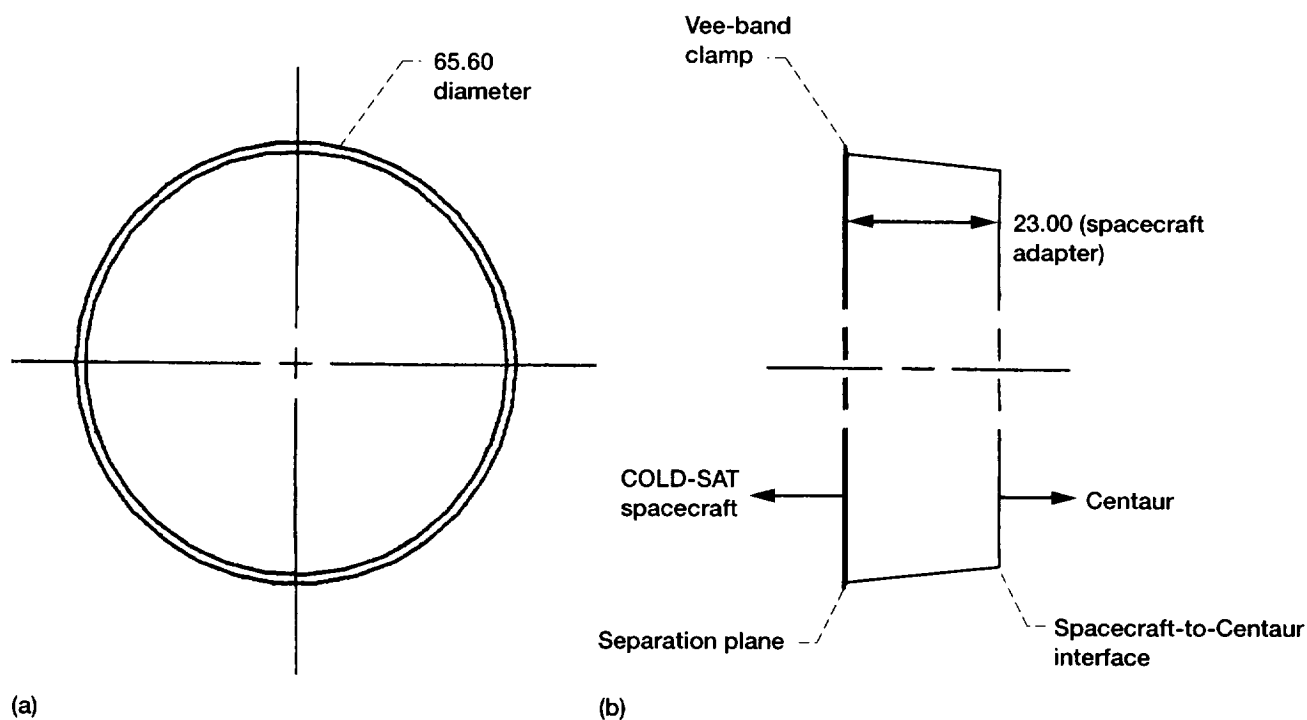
Spacecraft adapter. (a) Top view. (b) Side view. Dimensions are in inches.
